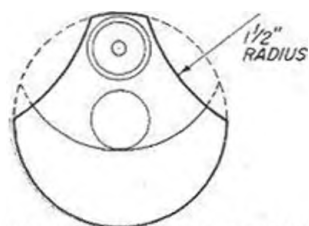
REAR VIEW OF CRANK SHAFT SHOWING CUTAWAYS FOR EXTRA COUNTERBALANCING
